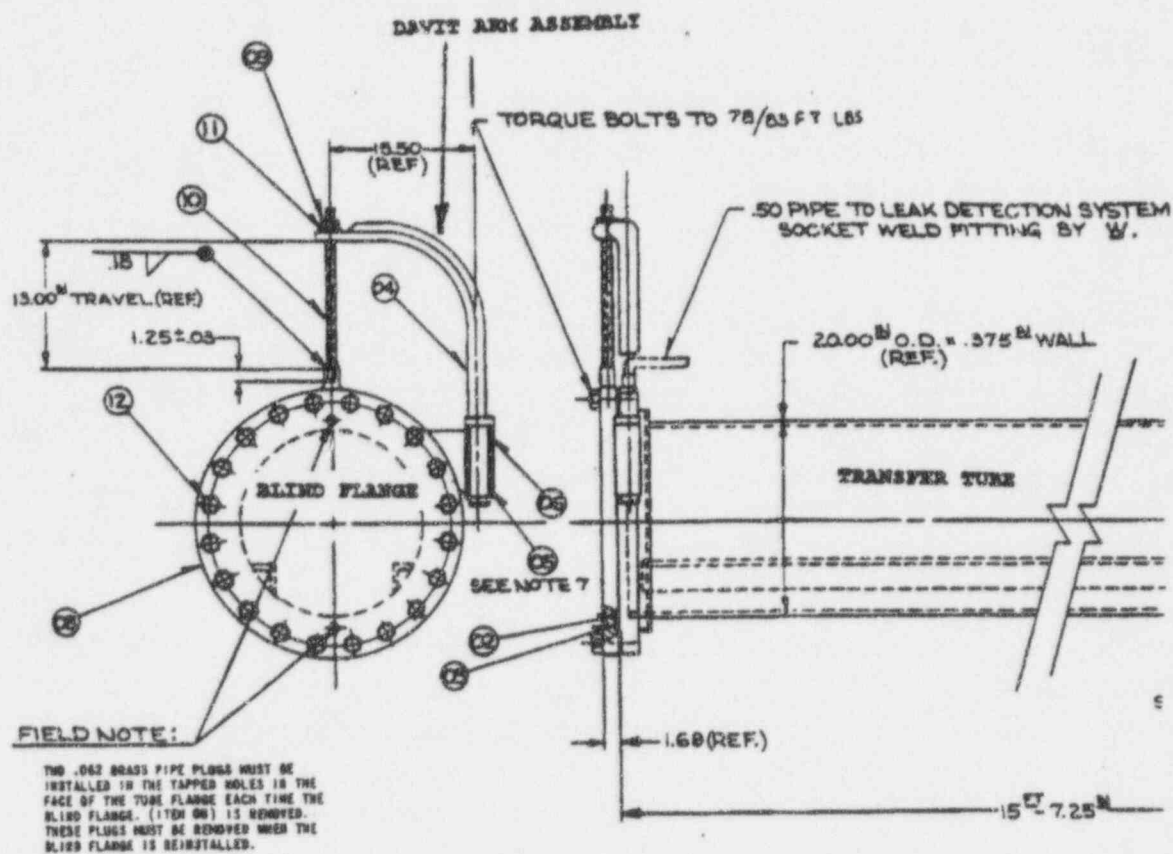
Fuel Transfer Tube Blind Flange Assembly
